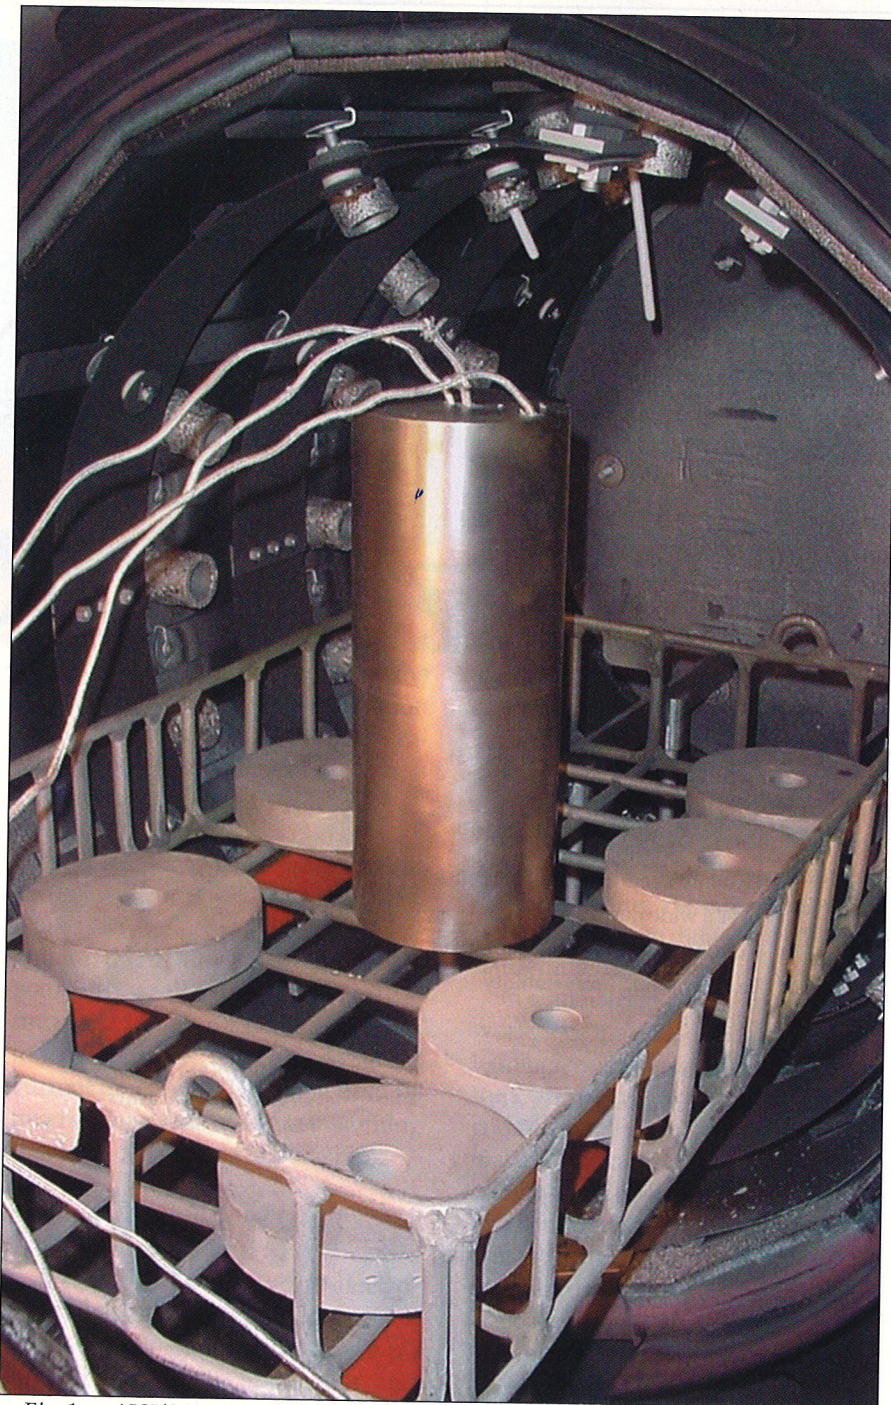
AISI/SAE 4140 alloy steel test piece with surface core and radius core thermocouples attached. The bar is 12 in. (305 mm) long and 5 in. (125 mm) in diameter. Note the ballast used to bring the vacuum furnace load up to a constant 200 lb (90 kg).
